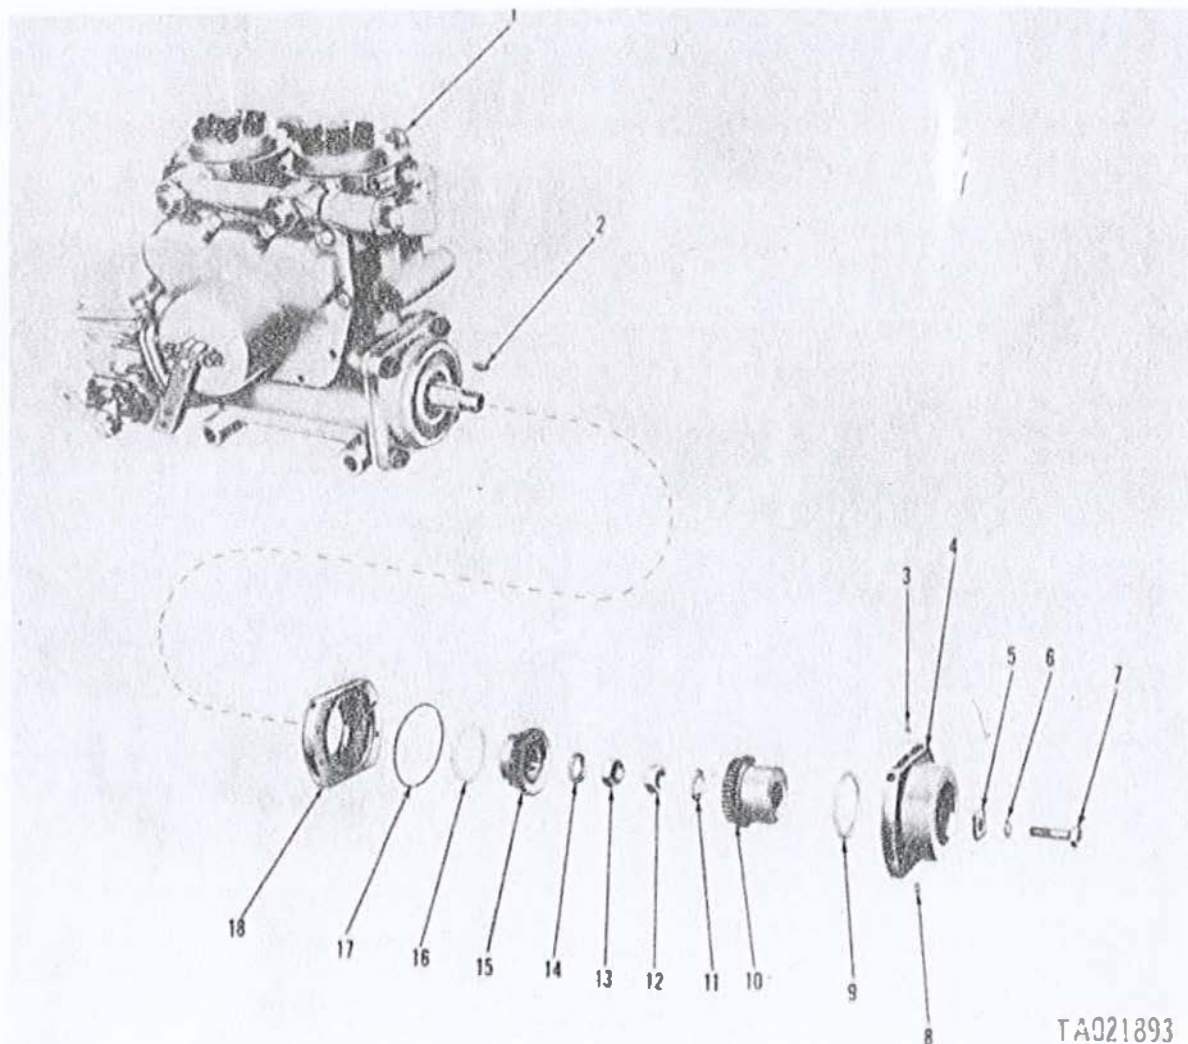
Rear fan and accessory drive housing, base assemblies and associated parts — exploded view.
